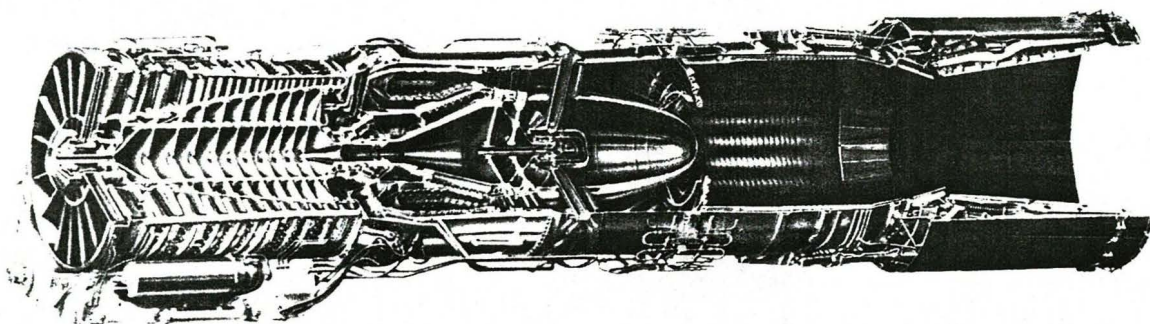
Phantom view of J93 turbojet engine. Note large nozzle and afterburner areas. (courtesy General Electric)
